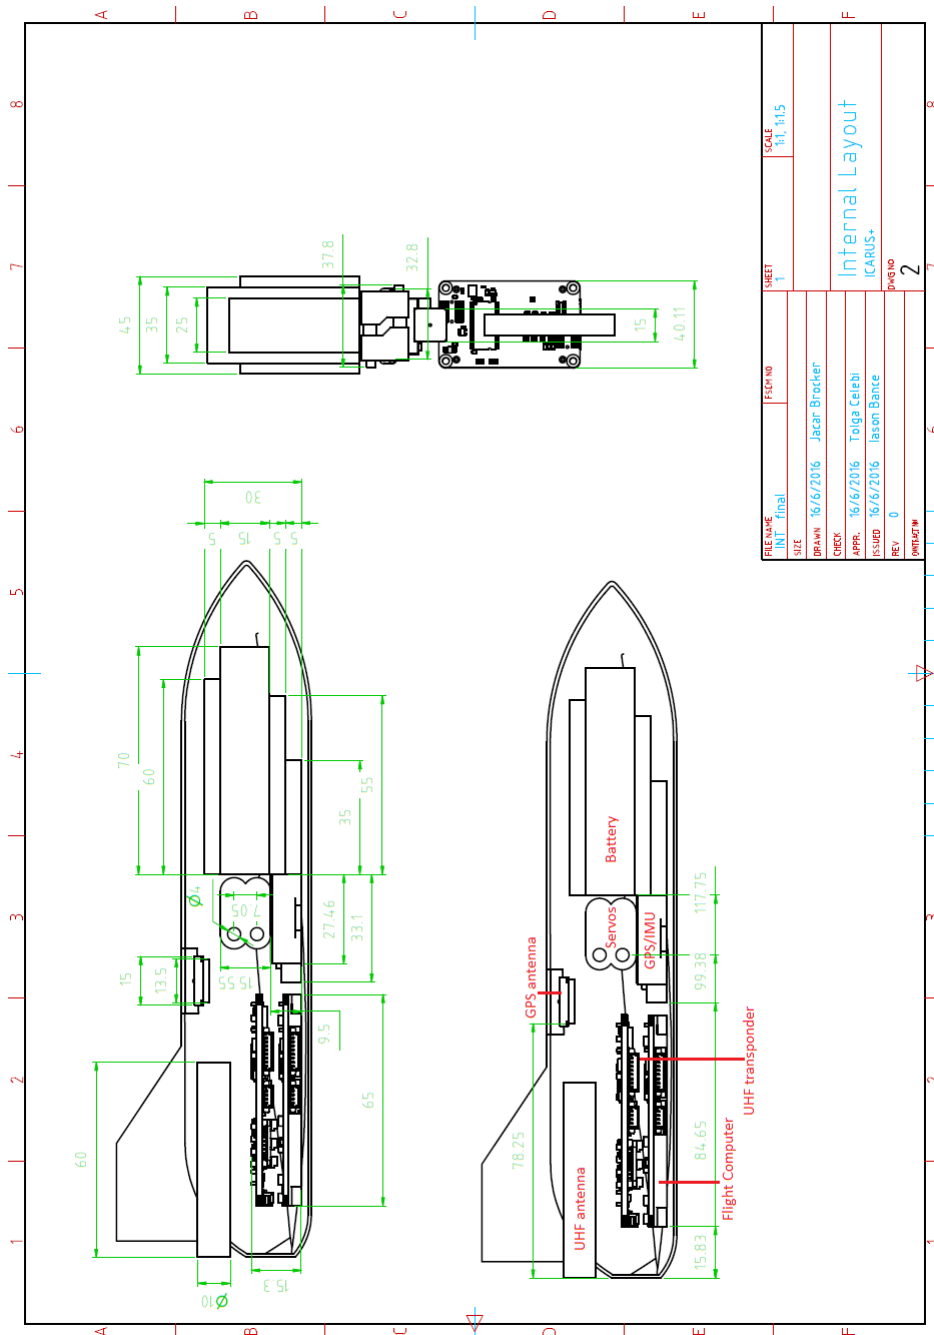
Technical drawing of the internal lay-out of the ICARUS+.
